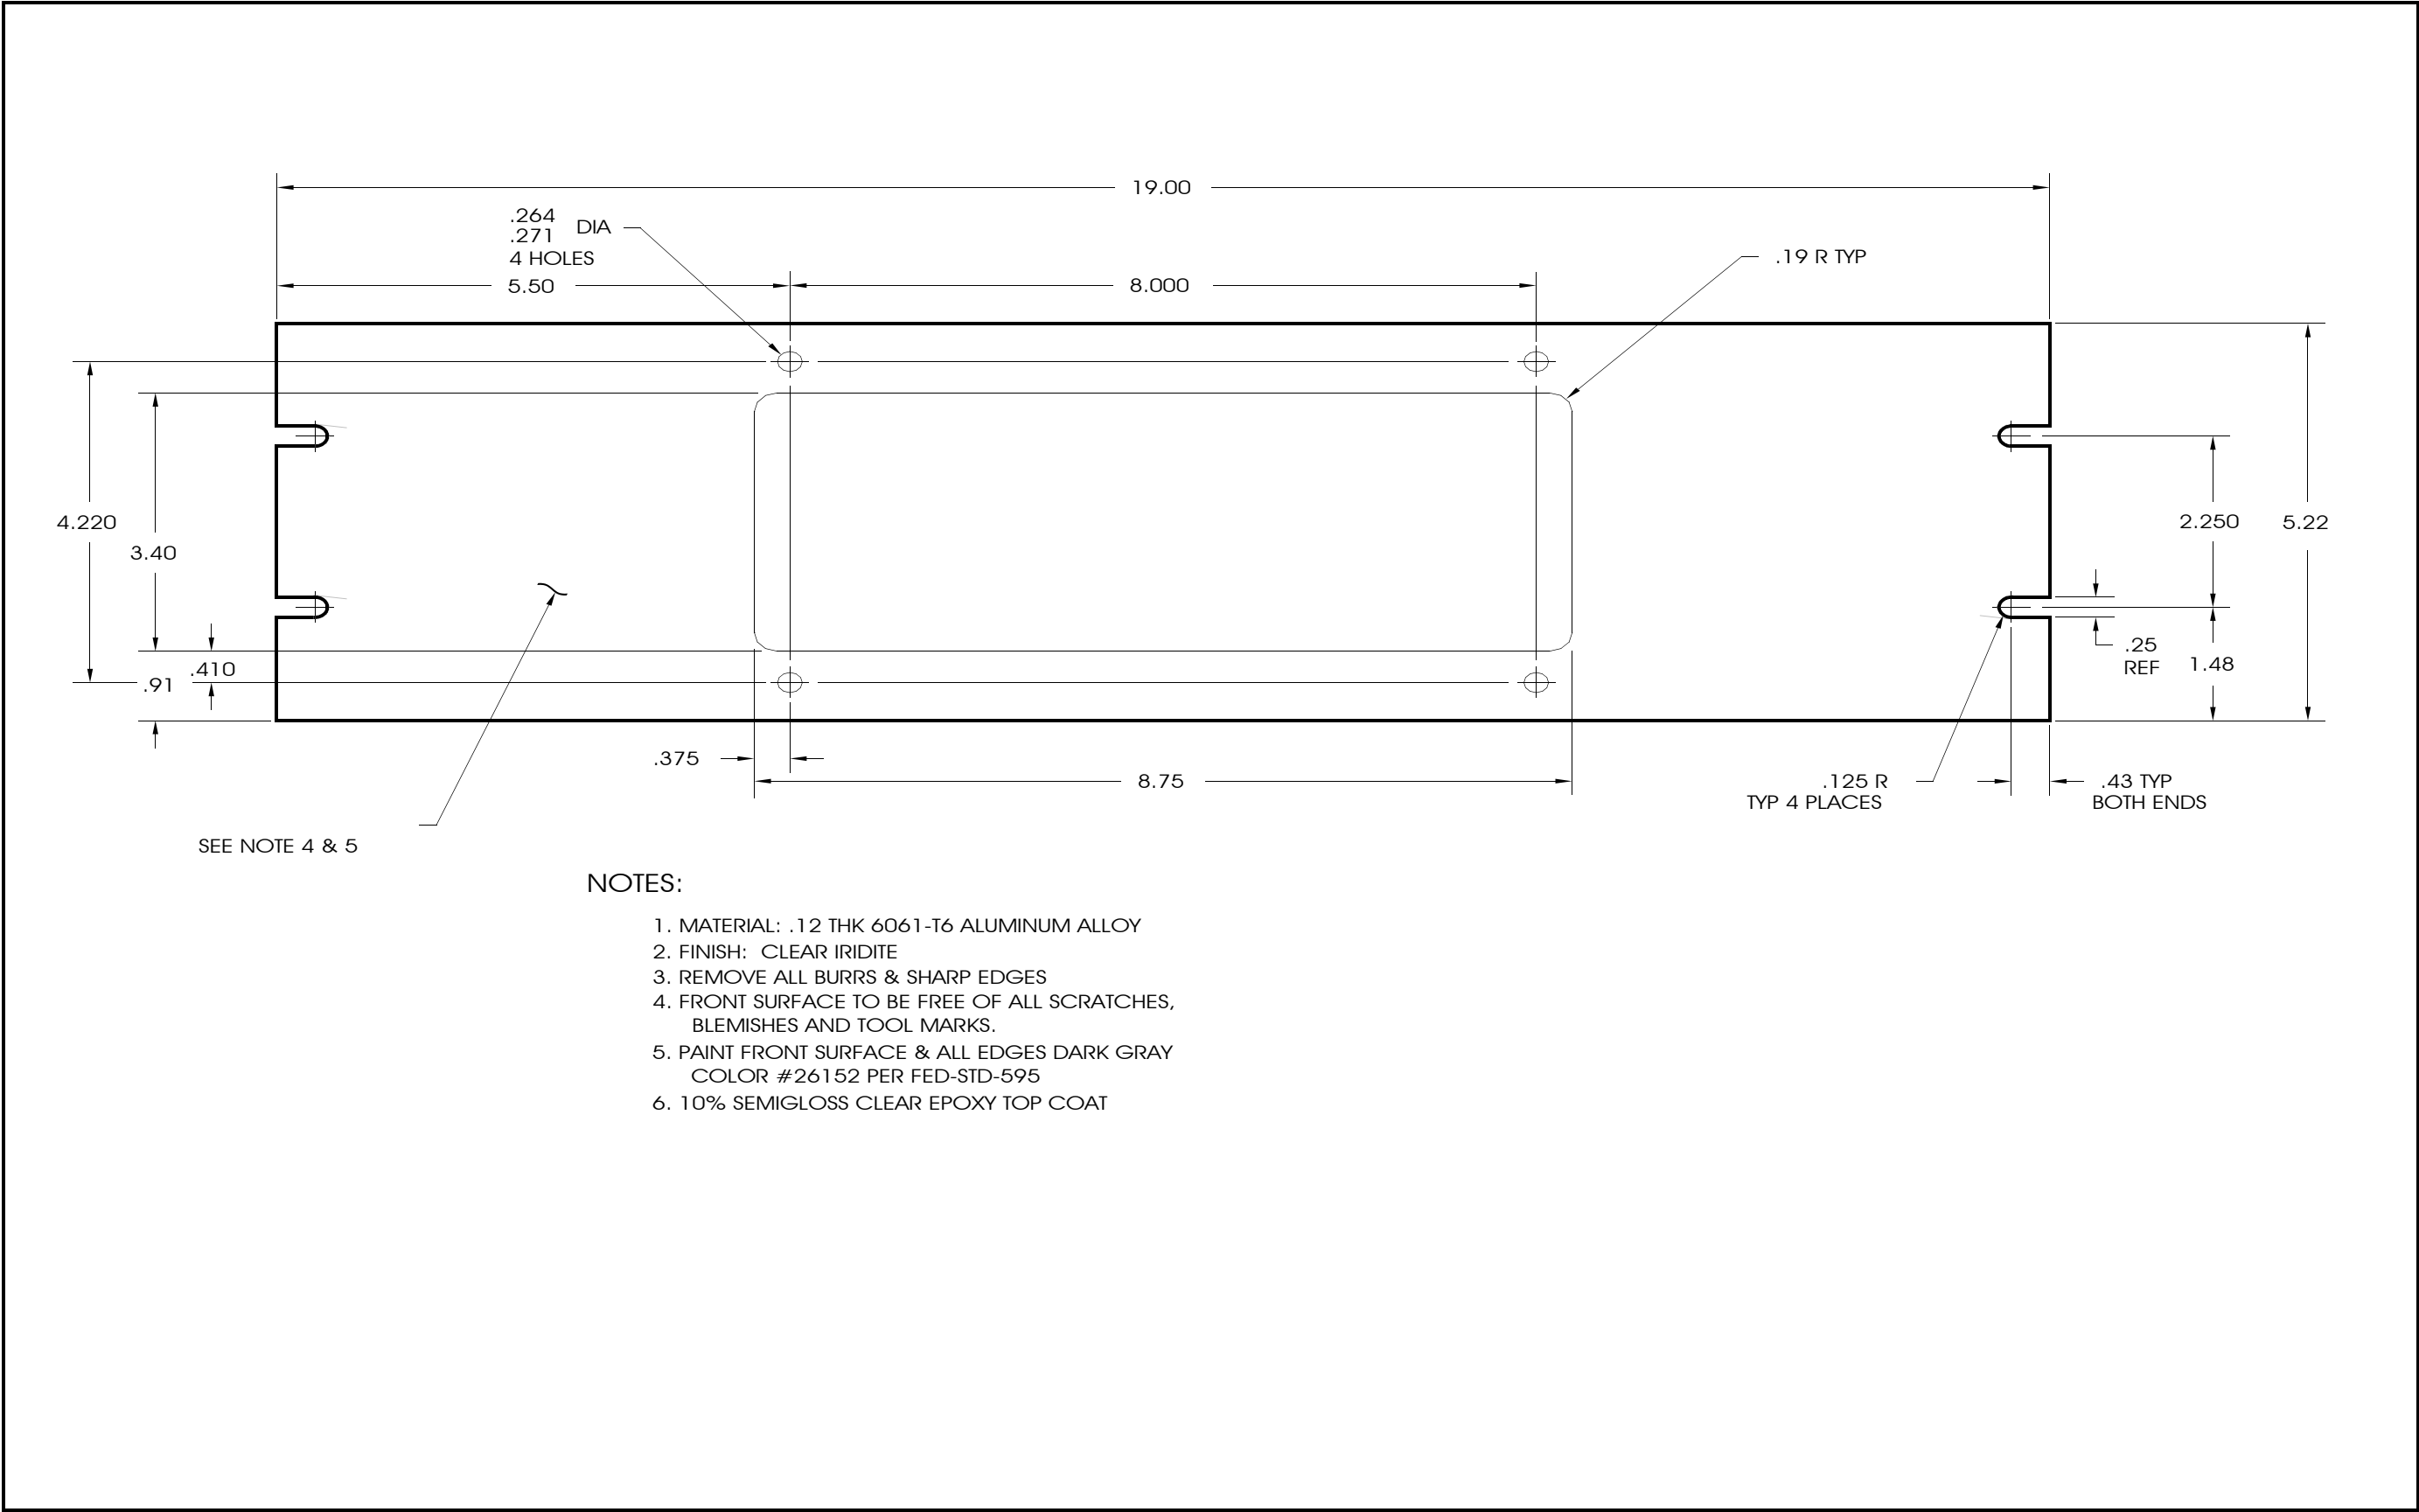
Panel and Rack Mount Dimensions (Dwg. #712-255)
